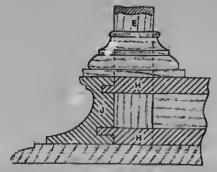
Vertical Section of Basa of Columnar Stand.
